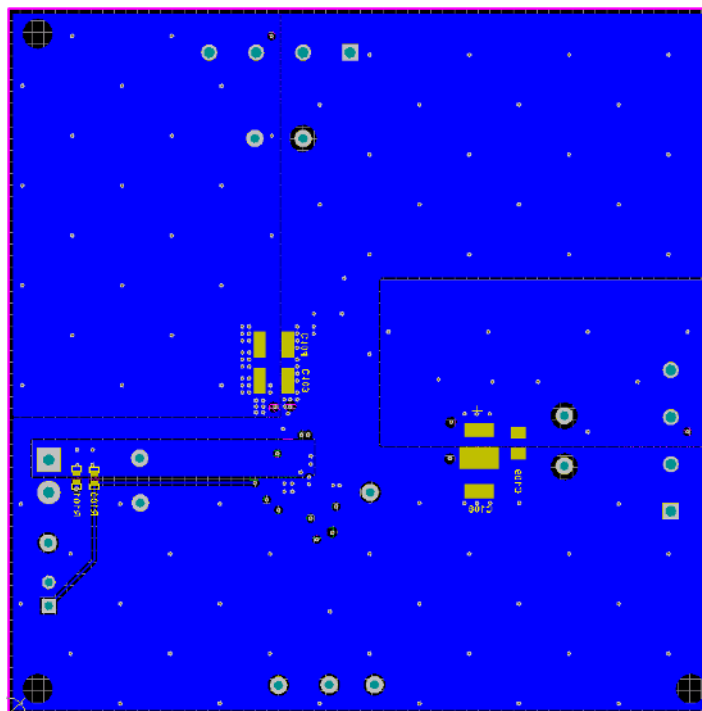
CSD87381PEVM-603 Bottom Assembly Drawing (Bottom View)
